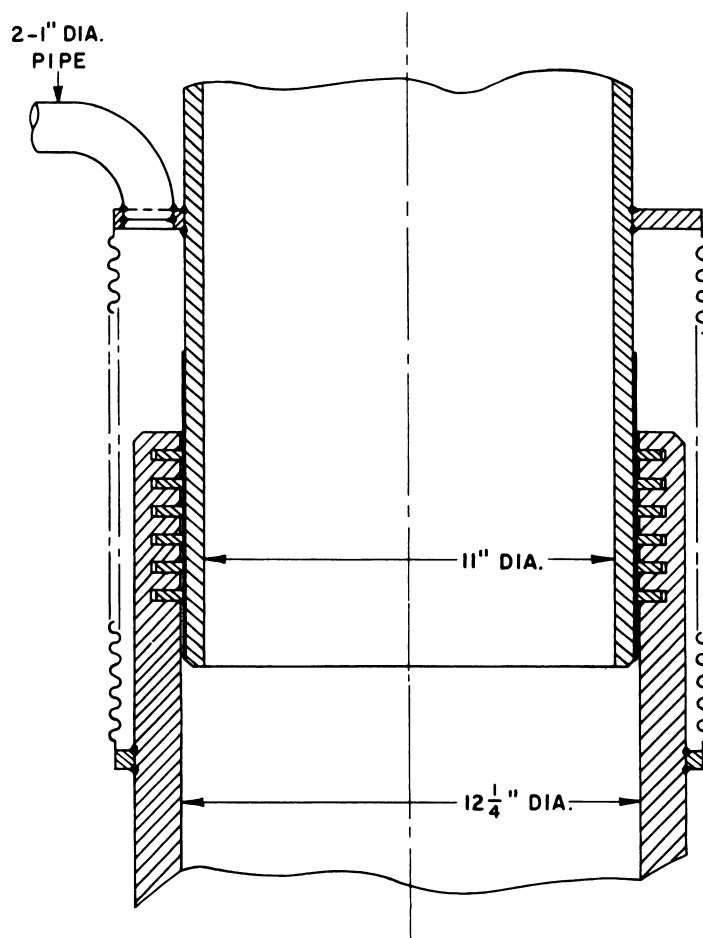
Piston-ring-type Slip-expansion Joint. Reprinted from NP-3683, Feb. 15, 1952.
